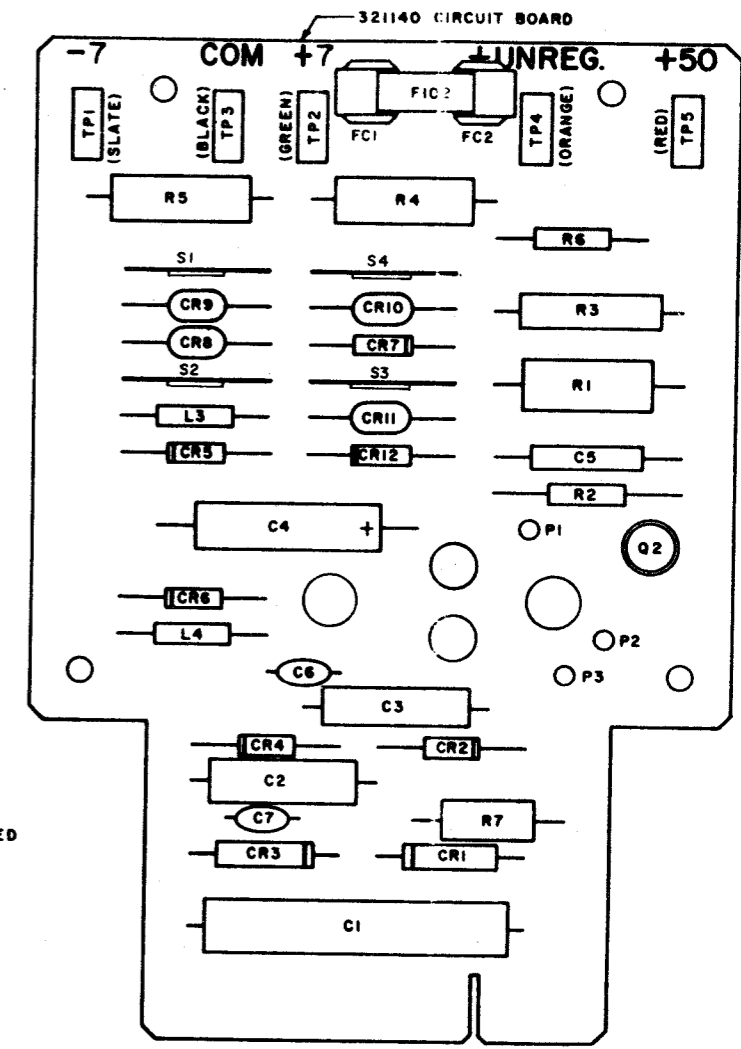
321290 Circuit Board Assembly w/Heat Sink (Sheet 1 of 2)
